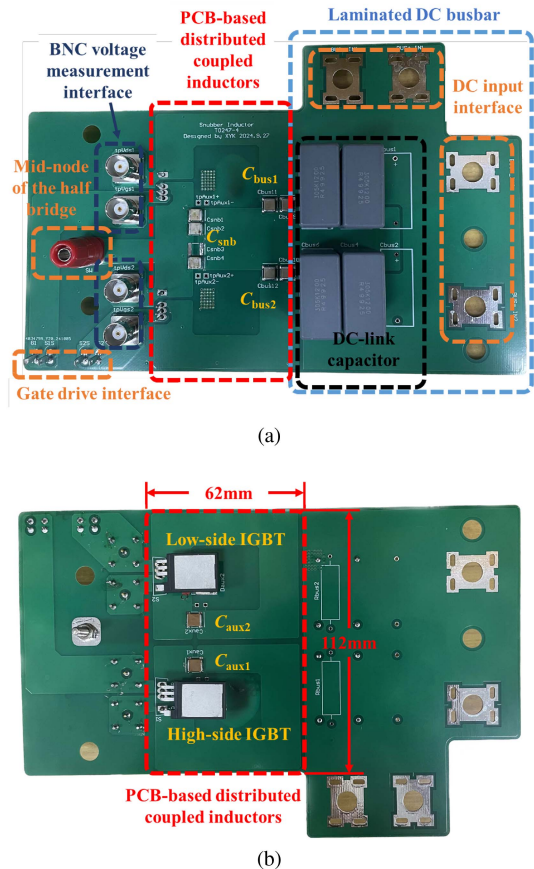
PCB of the proposed design. (a) Top view. (b) Bottom view.
